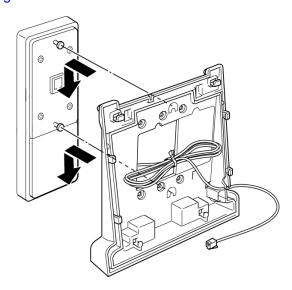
Wall Mounting Base Plate on a Wall Plate
